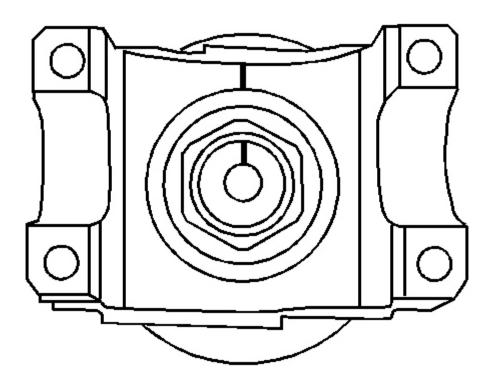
View Of Pinion Shaft & Pinion Yoke Alignment Marks Courtesy of GENERAL MOTORS CORP.
